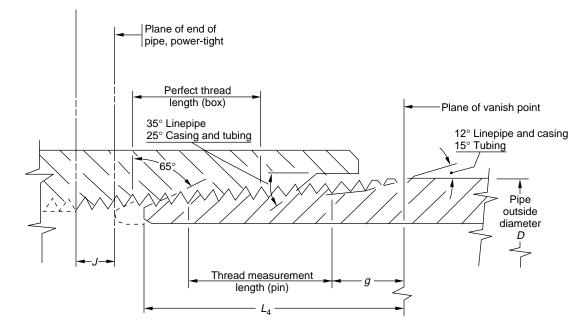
Basic Dimensions of Line Pipe Threads and Casing and Tubing Round Threads (Hand-Tight Makeup)
